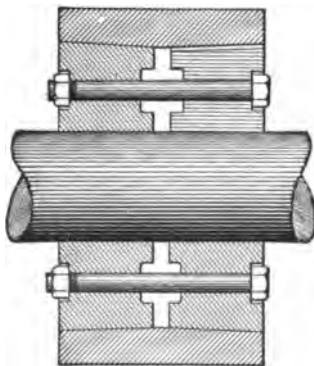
KROM'S METHOD OF ATTACHING SHELLS.
